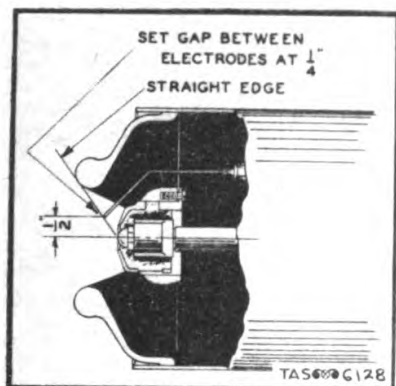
Setting Electrode Points on Combustion Head Assembly.
